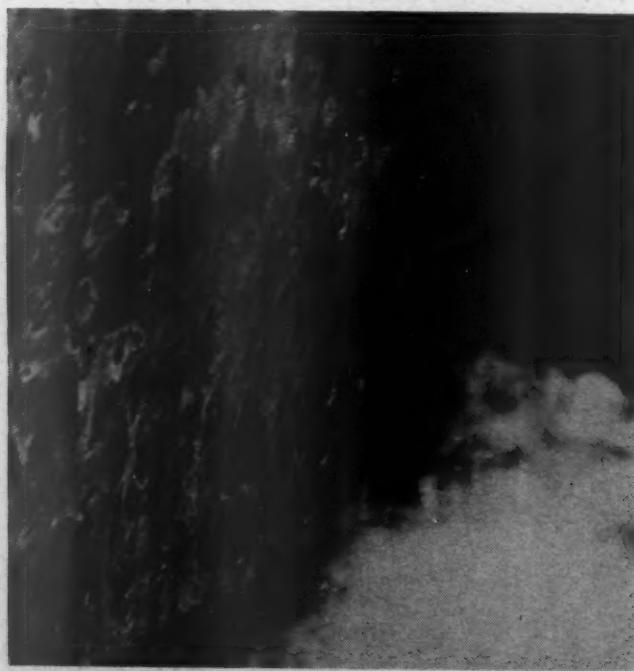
Leaky riveted-over staybolts in left side of firebox in test of riveted-over vs. seal welding
